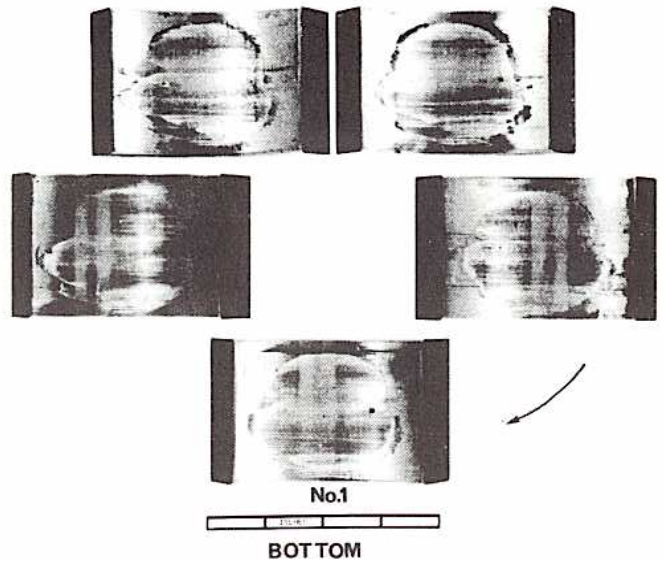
160 mm (6.3 in.) bore tilting pad journal bearing with minimum diametral clearance across the pivots of 0.160 mm (0.0063 in.) which wiped and seized on rapid start-up to 5,000 rev/min from cold.
